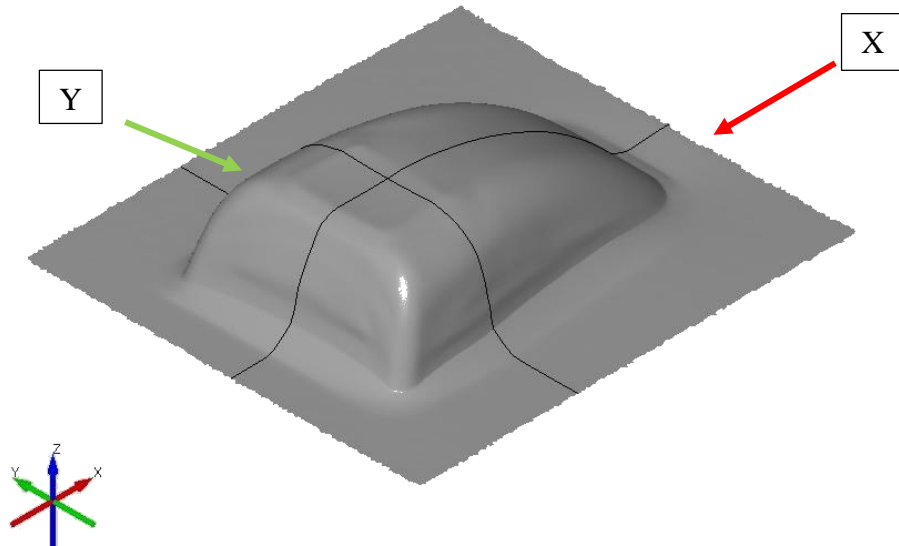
The surface of real car component from optical measurement with the tool diameter of 10 mm.
